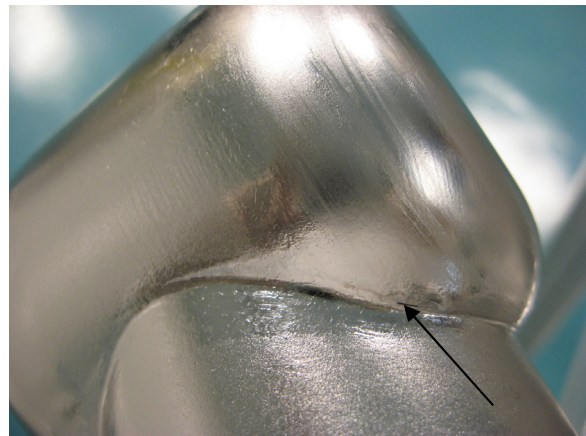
Saddle weld responsible for leaks in four cavities after BCP treatment. Arrow indicates crack.
